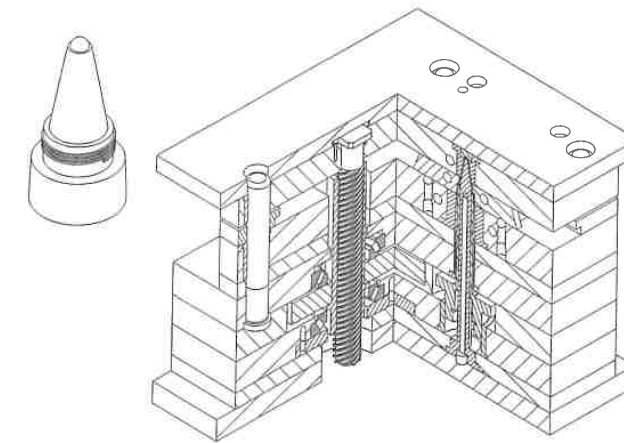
Mold including an internal unscrewing mechanism, side action, and a stripper mechanism used to produce a cap with both an internal and external thread (Drawing by Tom Garman).
